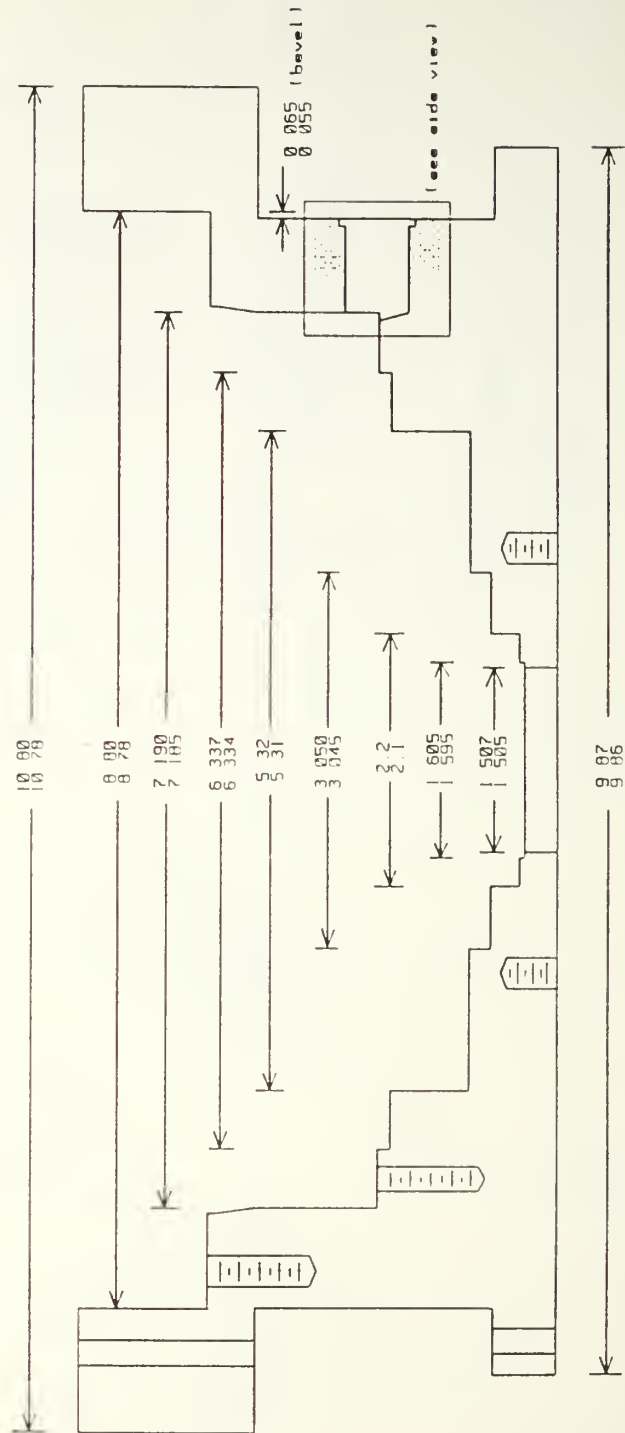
Cross-sectional View of the Driver Housing Showing Horizontal Dimensions along X-X' in Figure C-1
